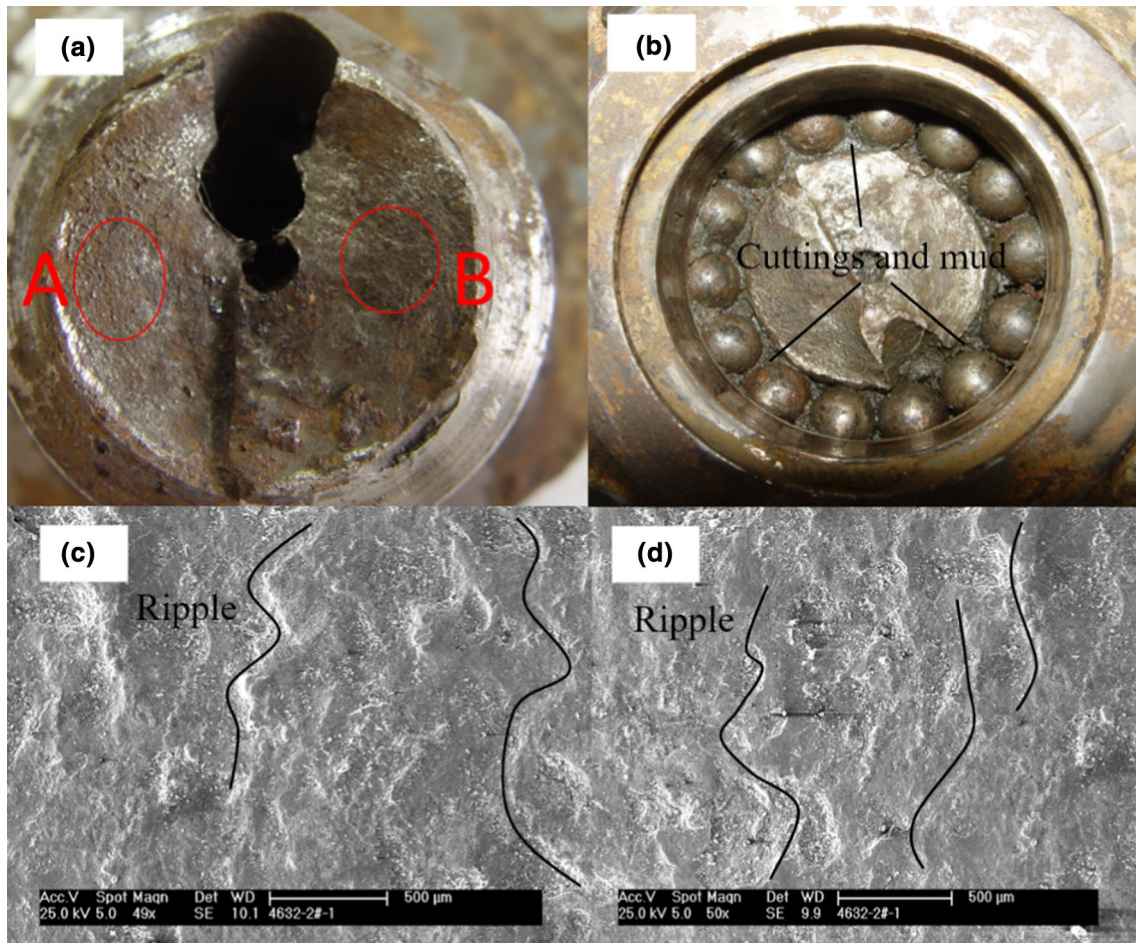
Fracture of the roller cone bit bearing (a) bearing fracture (connecting with claw) (b) bearing fracture (inside the cone) (c) magnified plot in circle A (d) magnified plot in circle B
